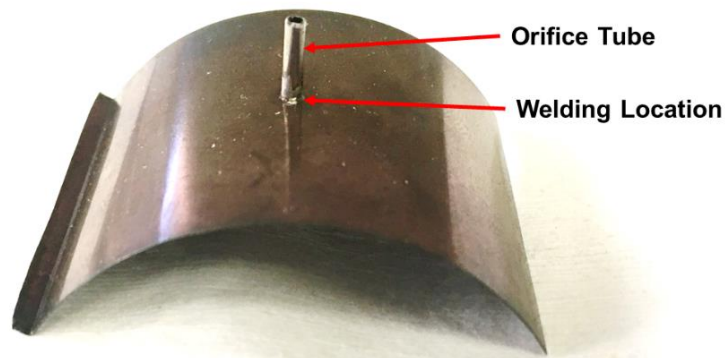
Top foil for three-pad HAFB with welded orifice tube
